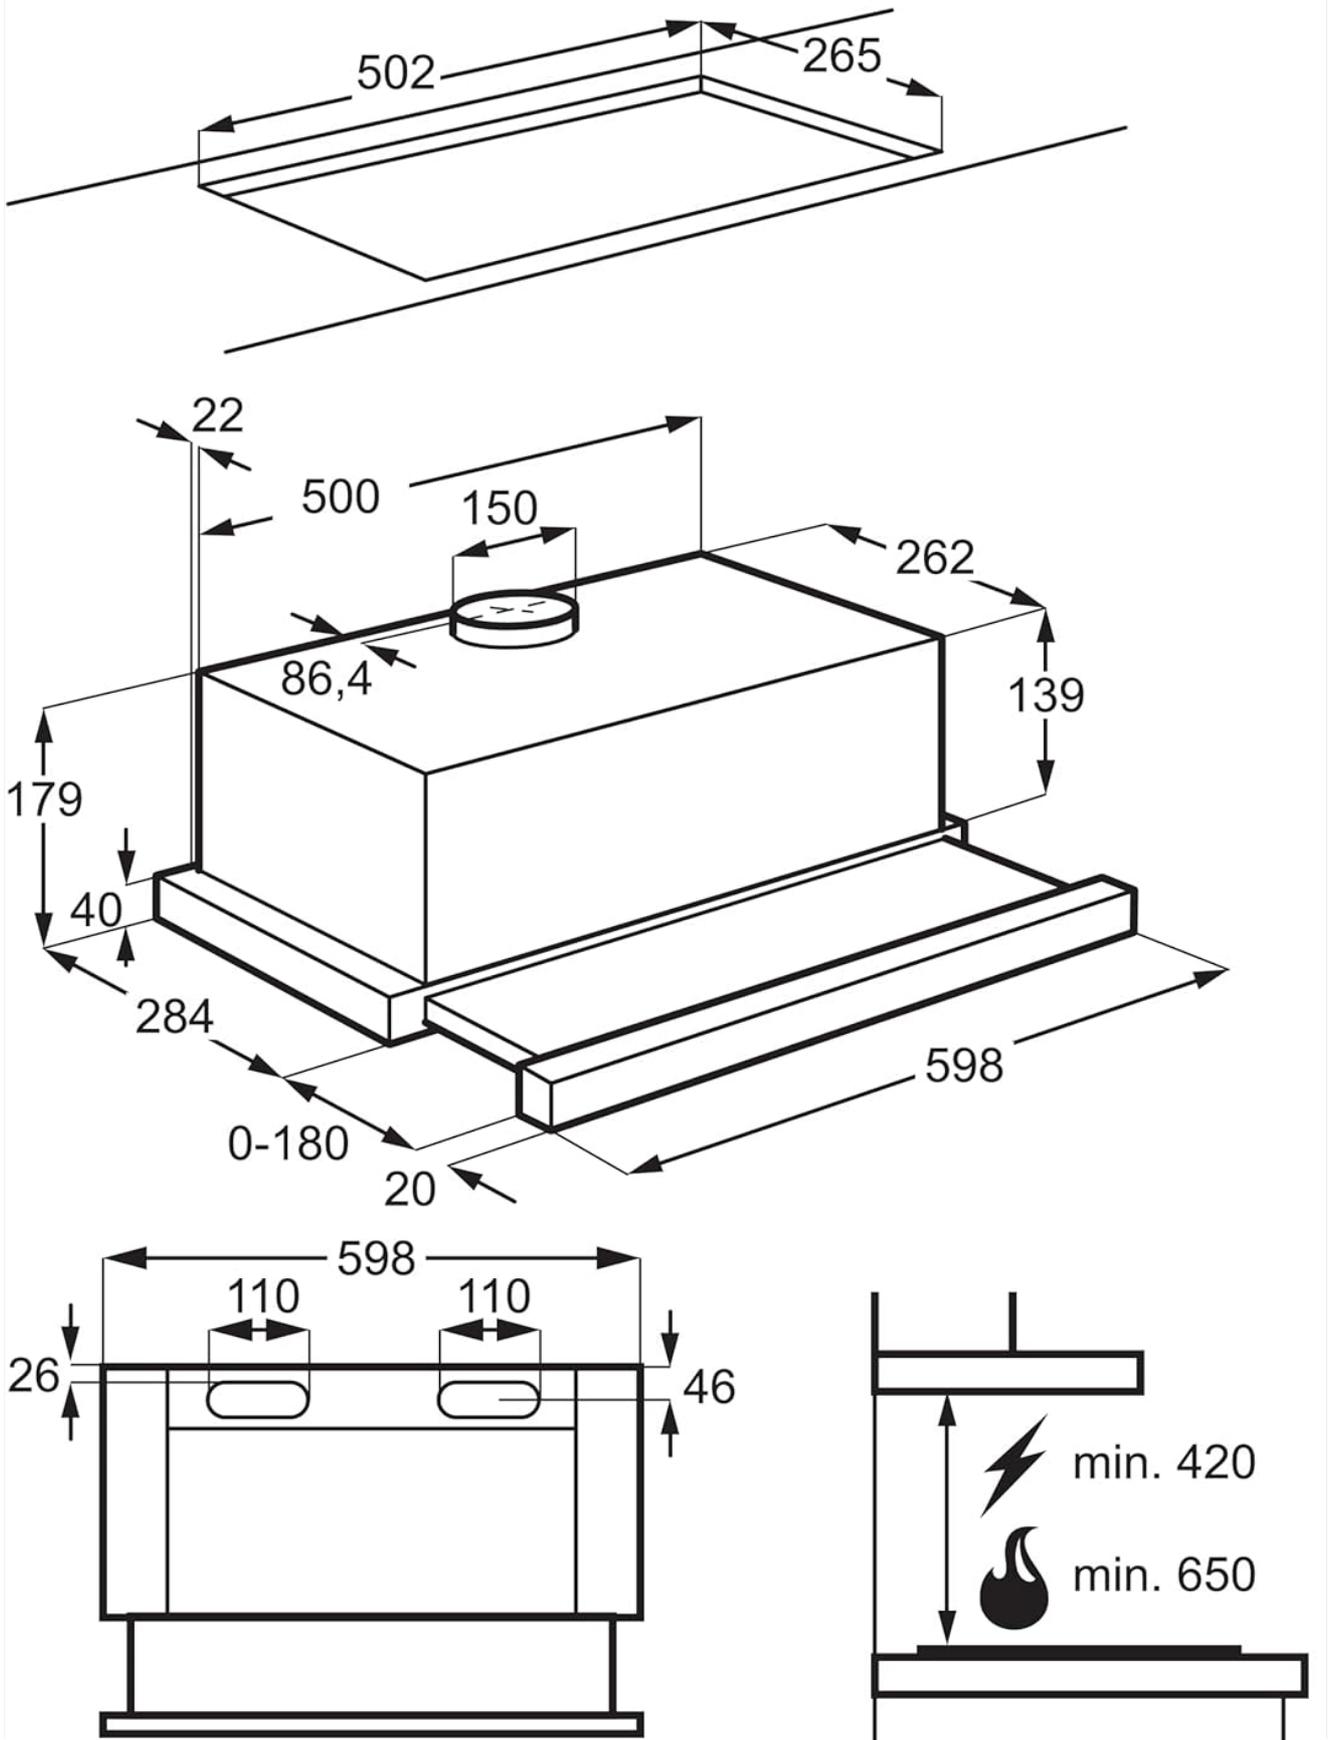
Technical drawing illustrating the dimensions and installation clearances. A schematic diagram illustrating the precise dimensions of the Zanussi ZFP216S cooker hood and critical installation clearances, including minimum distances from electric (420mm) and gas (650mm) hobs.
